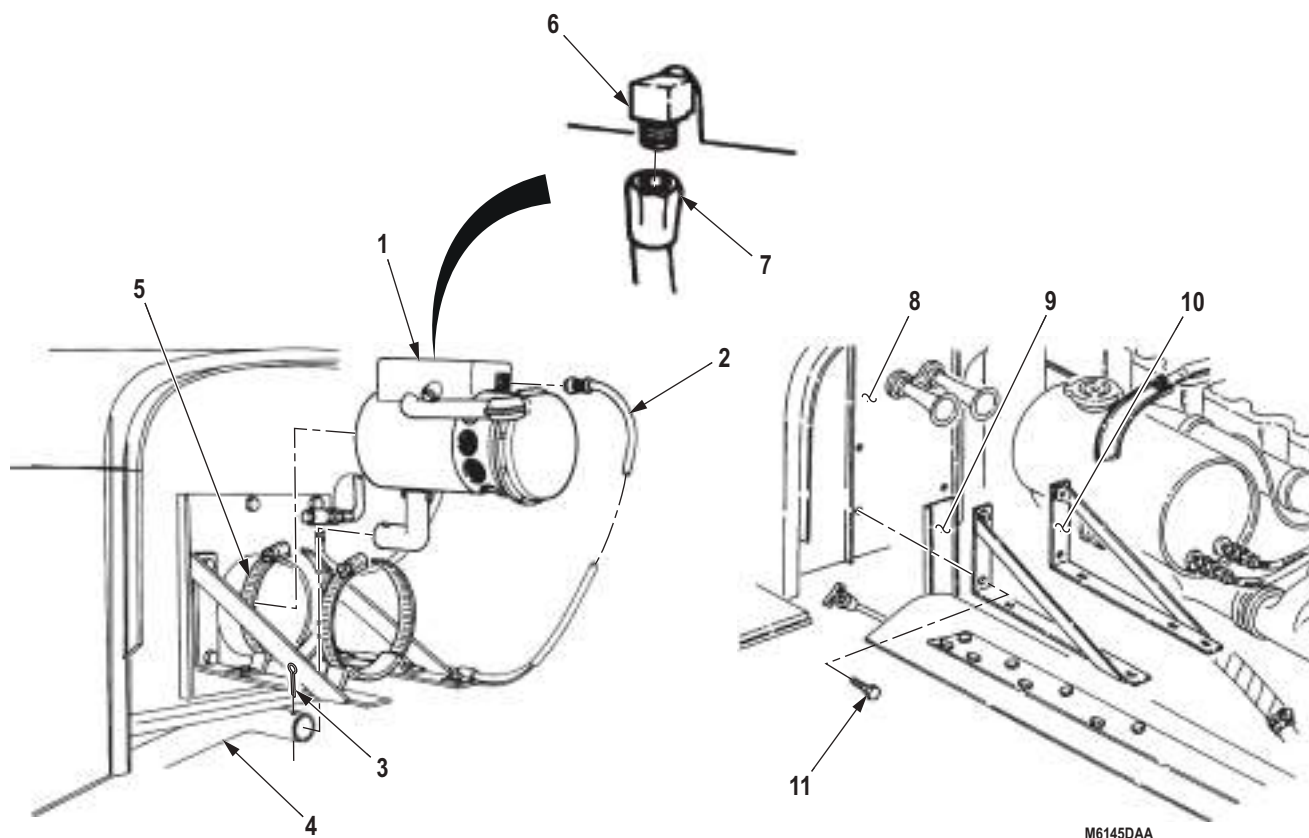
Personnel Fuel Burning Heater and Mounting Bracket Removal (M939/A1).
